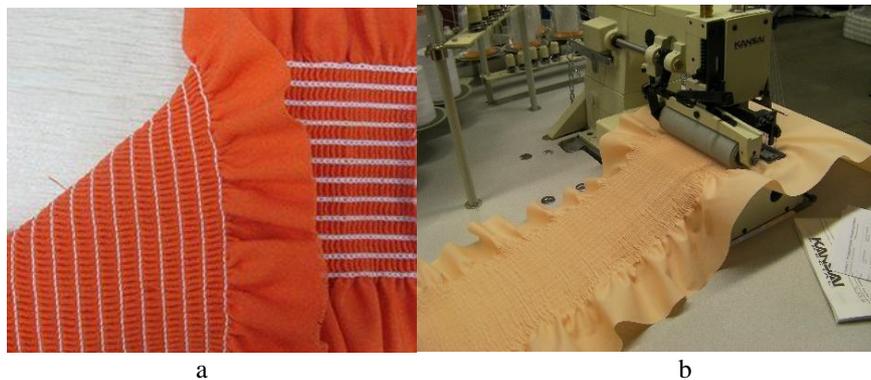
Shirring with single elastic thread and stitches 101 (a) a machine for shirring with a metering device on the top for elastic needle threads (b)
